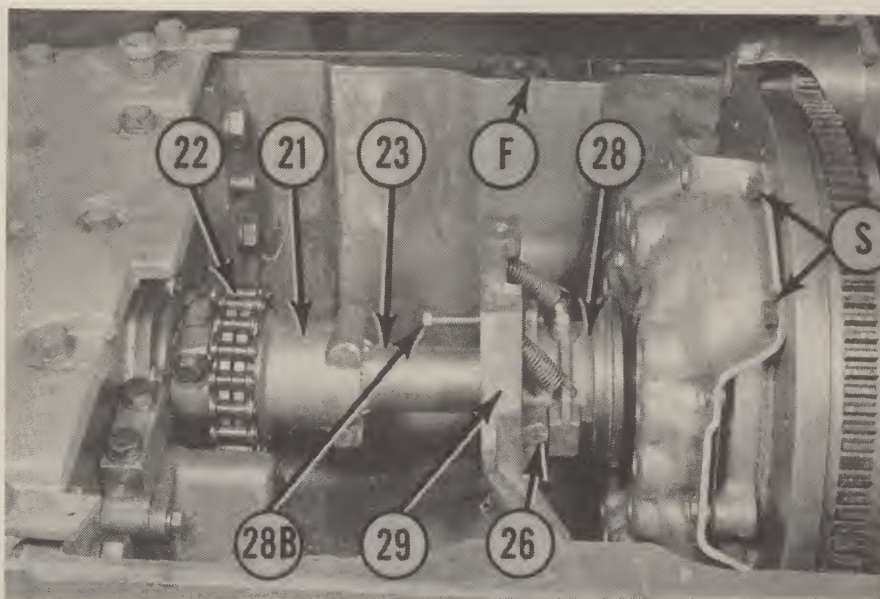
Clutch to transmission connections. Dust cover (40—Fig. 0457) is anchored to front frame (F) and to release bearing carrier support (29). The pto drive shaft on six cylinder models with continuous type pto passes through hollow clutch shaft (23) and is splined into flywheel. Bolt (28B) should be adjusted to provide $\frac{1}{2}$ " maximum release travel.
